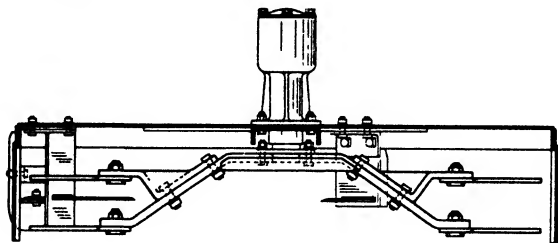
Showing a rotary cutterhead with offset bars to which are attached free-swinging cutting blades. (*Servis Equipment Co.*)
